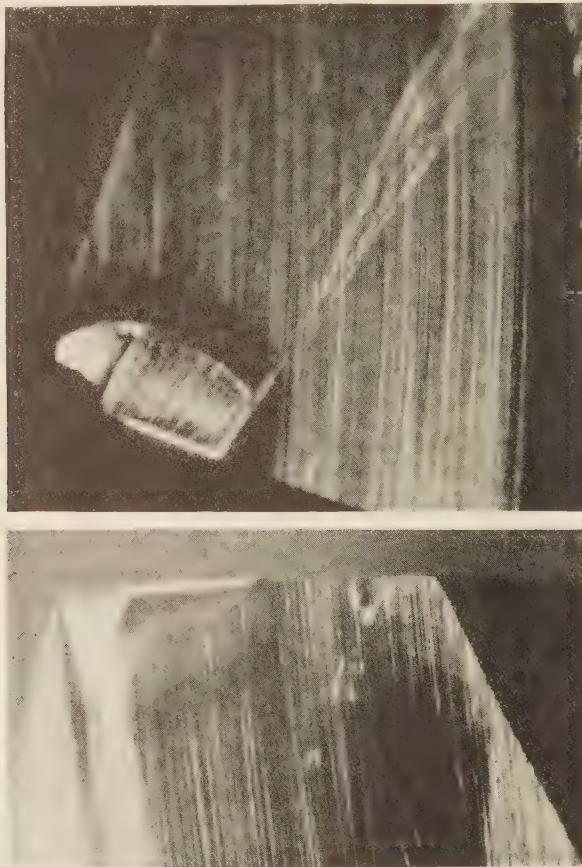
TYPES OF TOOL FAILURE AFTER CUTTING MONEL METAL
